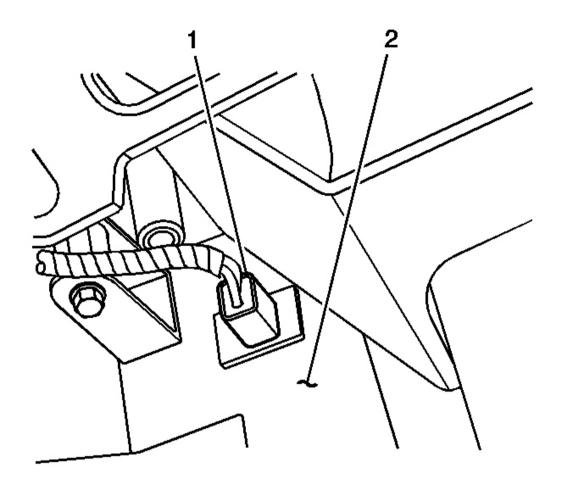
Lower Right Air Temperature Sensor & HVAC Module Courtesy of GENERAL MOTORS CORP.
